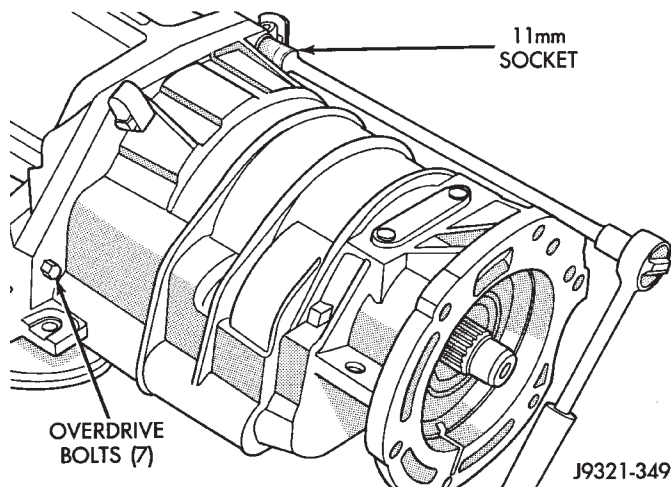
Removing/Installing Overdrive Unit Attaching Bolts
